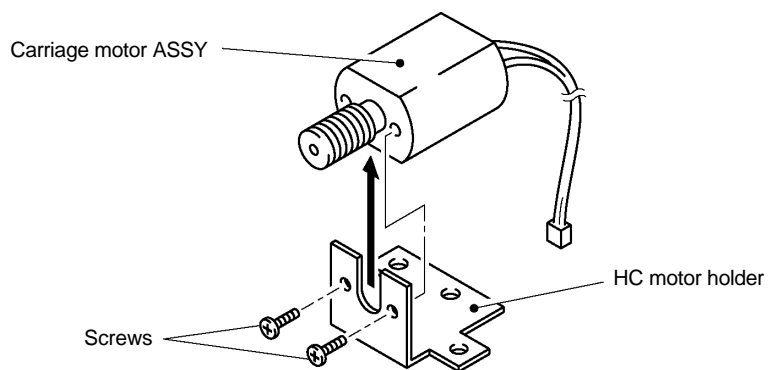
Removing the Carriage Motor ASSY (2)
